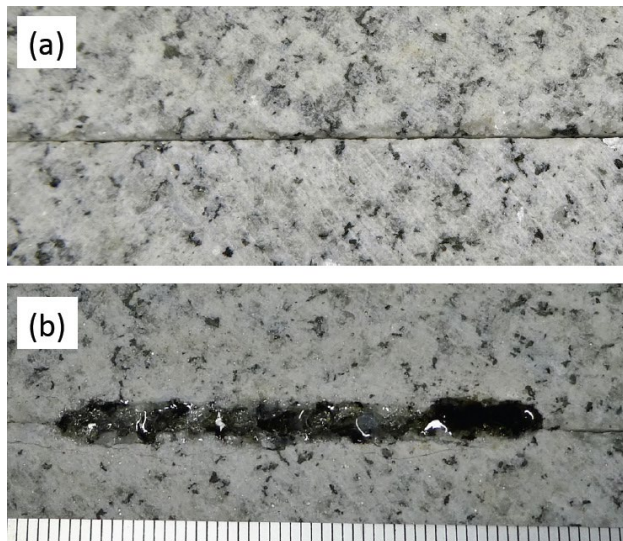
Butt welding of granite: (a) before and (b) after laser irradiation.
